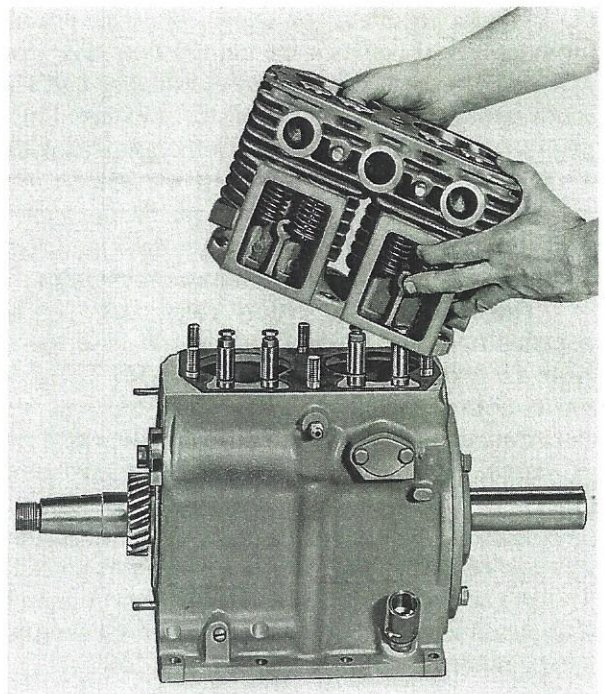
Two cylinder crankcase and cylinder block being assembled. Stud bolts in crankcase will hold cylinder block in place when nuts are tightened.
